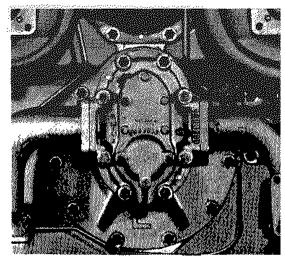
Main Lube Oil And Piston Cooling Oil Pumps
